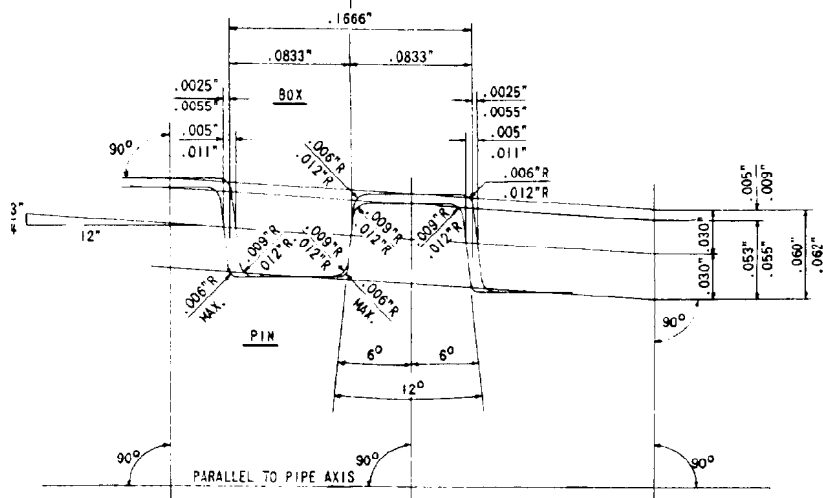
Product thread form, extreme-line casing joint sizes 5 through 7 $\frac{7}{8}$ in., 6 threads/in., 1 $\frac{1}{2}$ -in. taper/ft on diameter.
